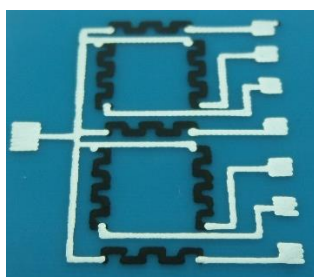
The silver and carbon ink 7-segment display patterns dispenser printed on interface layer
